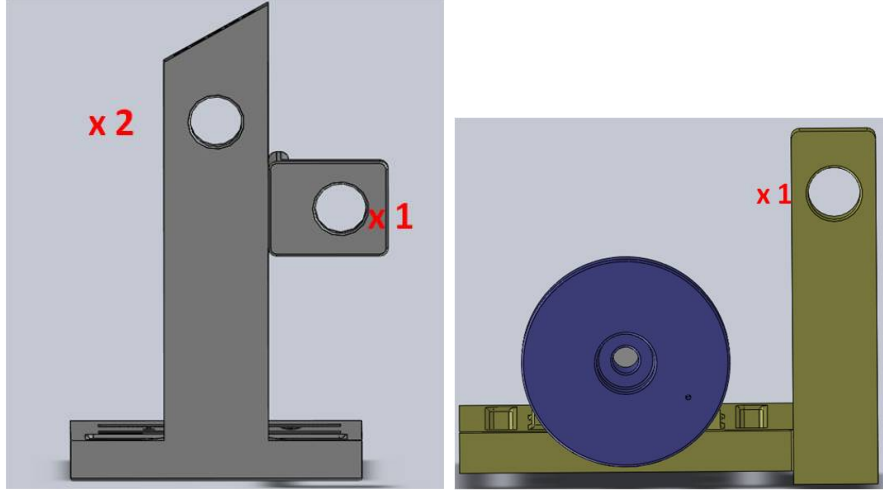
Boca Bearings Used For Frictionless Rotation
